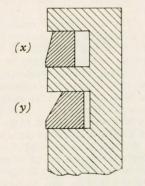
(x)—Shows light section bevel scraper with seven-degree angle for crosshead type piston. (y) shows heavy section bevel scraper for trunk type piston
